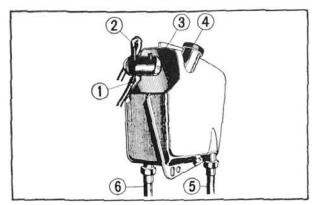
① Breather tube A ② Oil tank breather pipe
